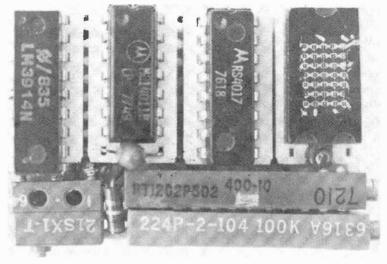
Photograph of the wrapped-wire prototype LED oscilloscope assembled on a small piece of perforated board about 1.2" \times 1.2".
